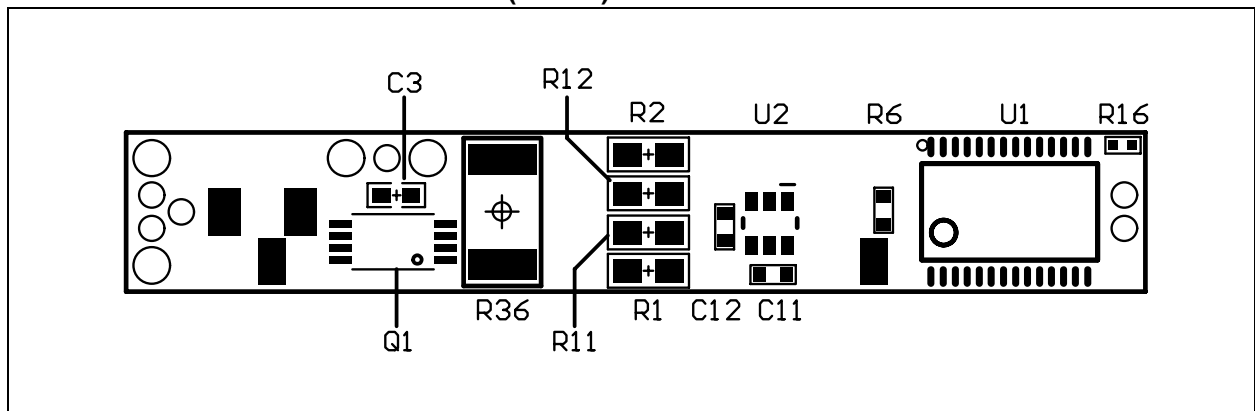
BOARD ASSEMBLY (SIDE 2)
